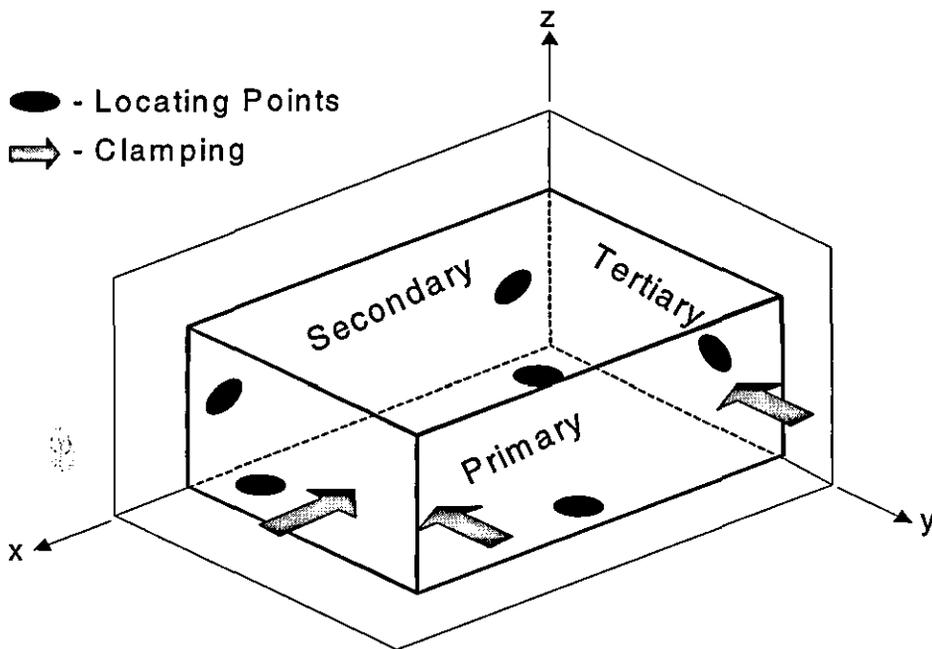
The 3-2-1 Locating Method for a Prismatic Workpiece
